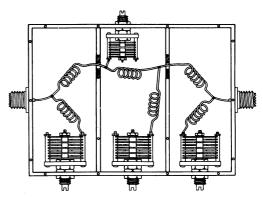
Top view showing the arrangement of the parts in a three-section, series-derived, low-pass filter. The top and bottom plates of the shield box are not shown. When these plates are bolted into position, the shield box completely encloses the components. The shield box should be bolted to the transmitter cabinet where the transmission line emerges.
